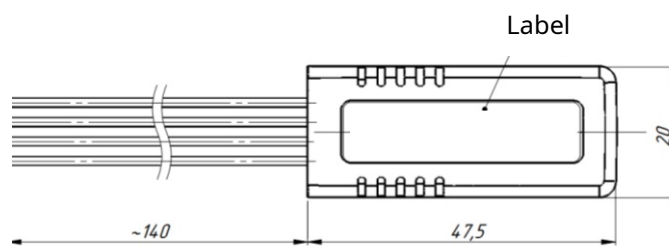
Dimensional drawing of the BRU22/BRU42 Reader model (thickness 12.5mm)
